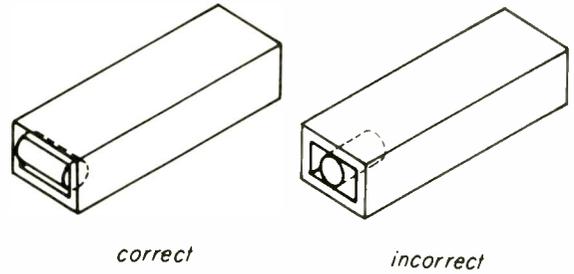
PM magnet in the nylon mounting sleeve.
